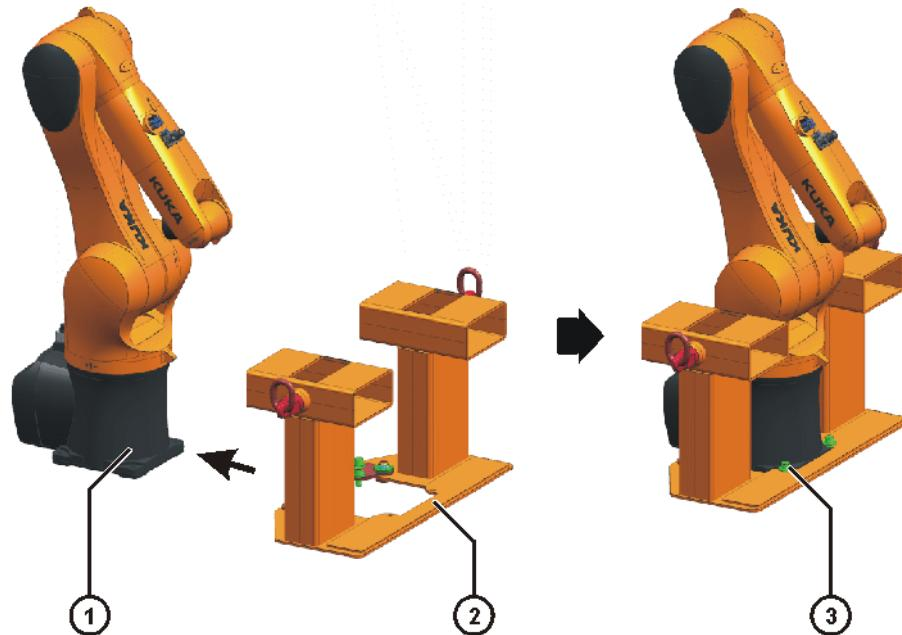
Pushing on the Load Lifting Attachment and fastening it at the front
